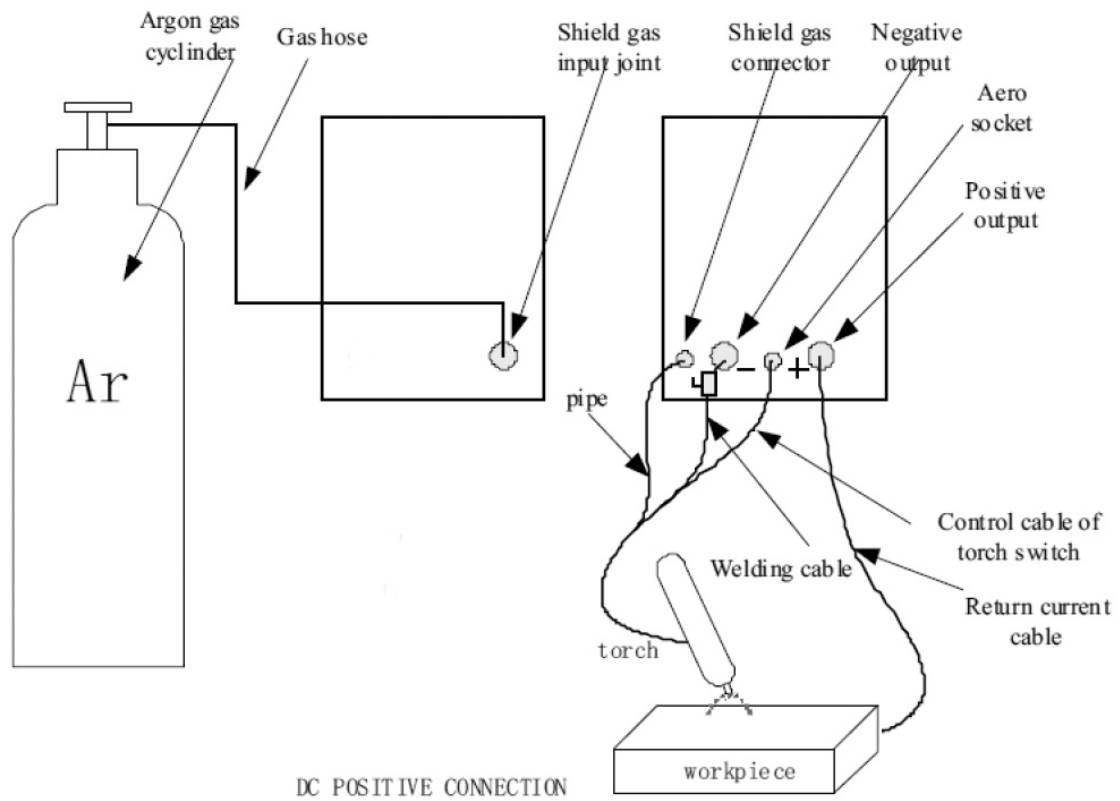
Connection of the equipment CRAFT-TIG 253 DC PULSE
